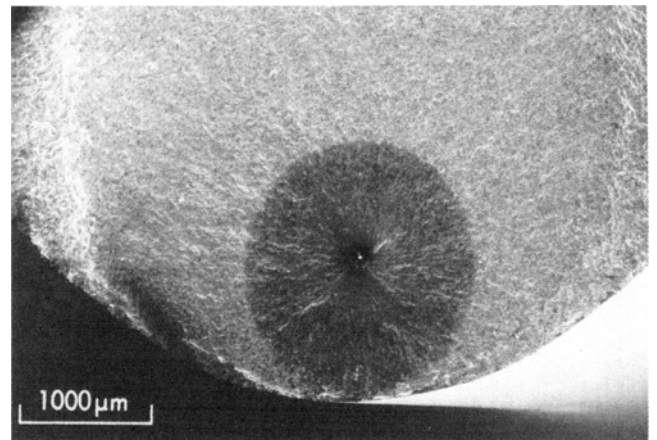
Subsurface crack initiation as observed on the fracture surface of an AF2-1DA specimen.
